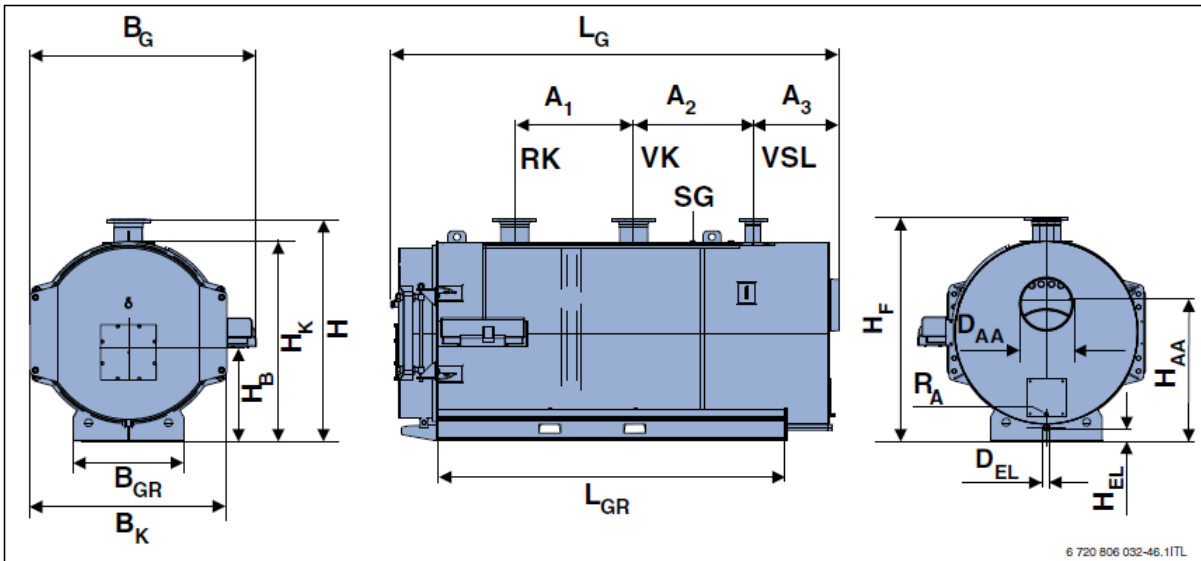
Dimensions, Uni 3000F 1040 kW and 1200 kW
